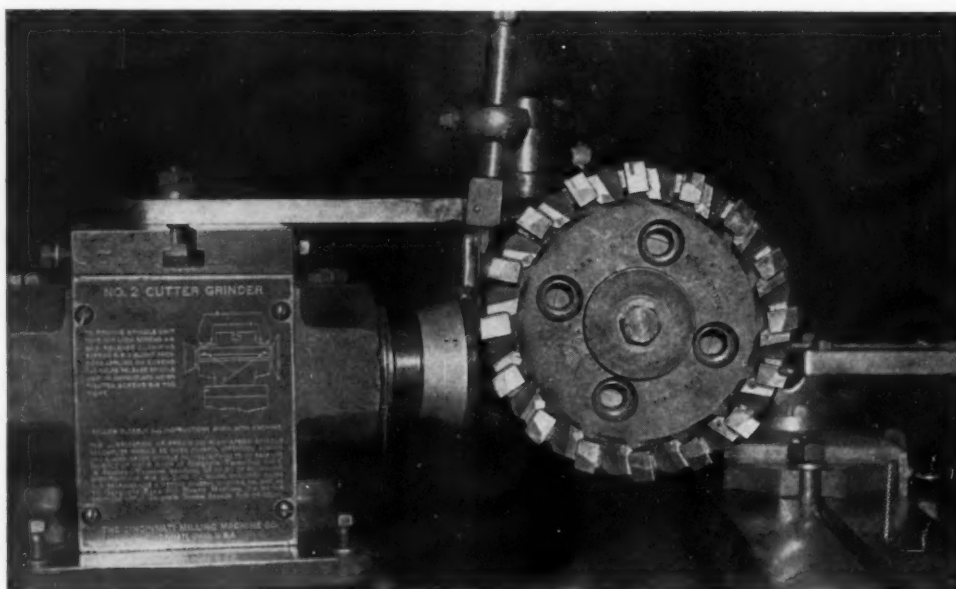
LAPPING PERIPHERAL CUTTING EDGE WITH DIAMOND WHEEL
